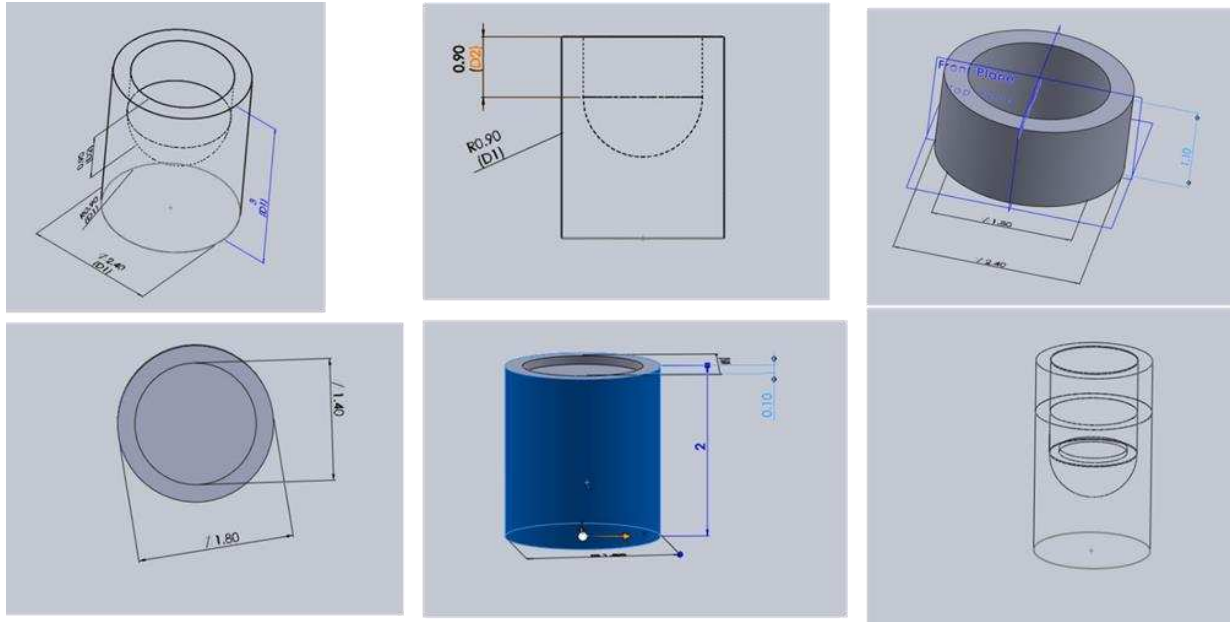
CAD images of hemisphere tooling showing individual parts and final assembly
